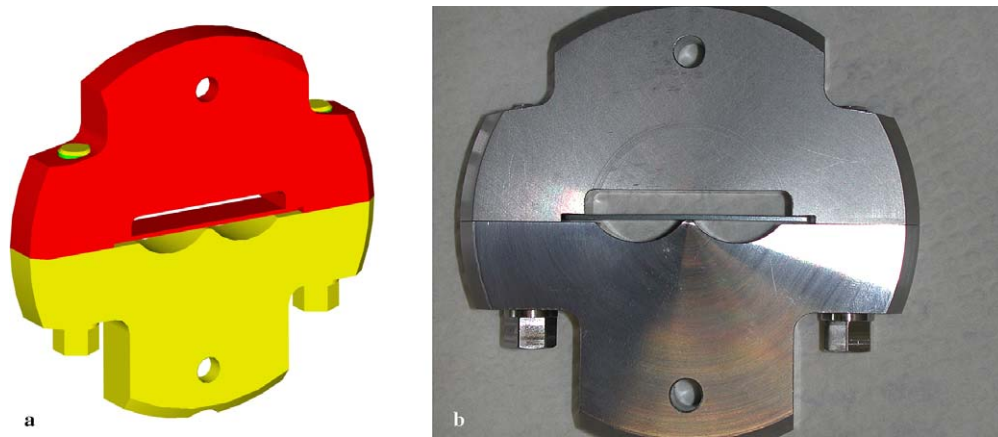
Sample holder with installed steel sheet: (a) schematic and (b) photograph.
